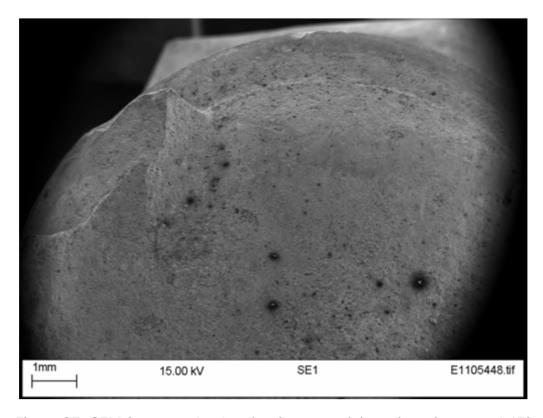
SEM fractograph, showing fracture origin region of a second 45° shear like fracture.
